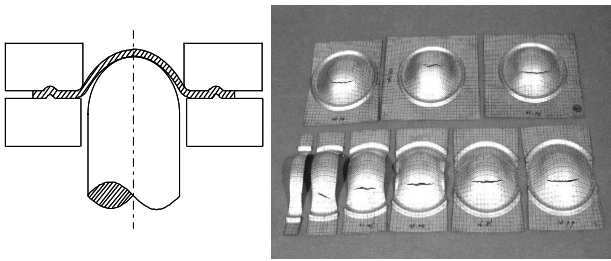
Schematic diagram of FLD test tool and examples for sheet metal
